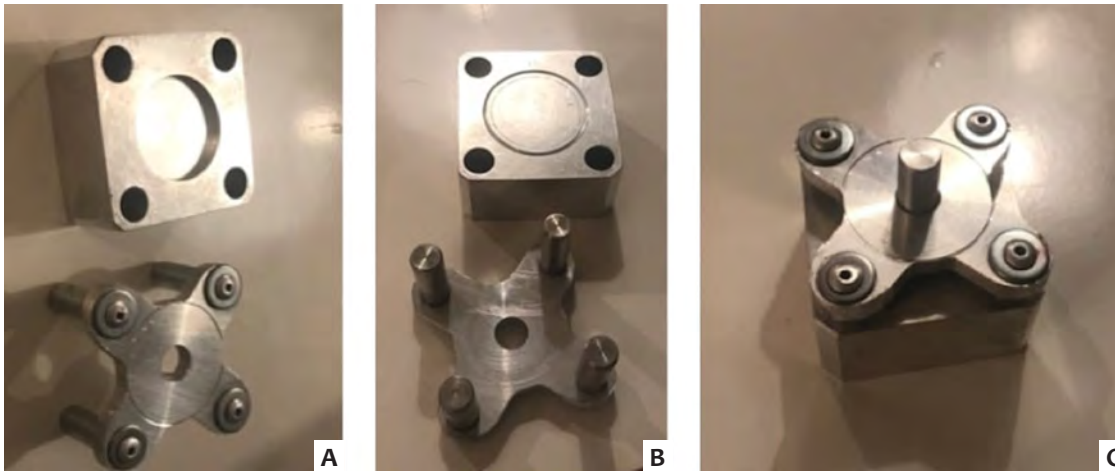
A - SmartMohs® prototype with its fitting for the plastic mold on one of the surfaces; B - On the opposite surface, flat area to directly flatten the sample; C - Perfect fit between the two pieces making a "sandwich" with the pin chuck
